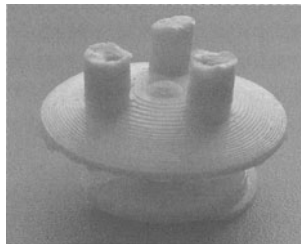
Tentative prosthesis produced by manual mold injection using the SL mold assembly
